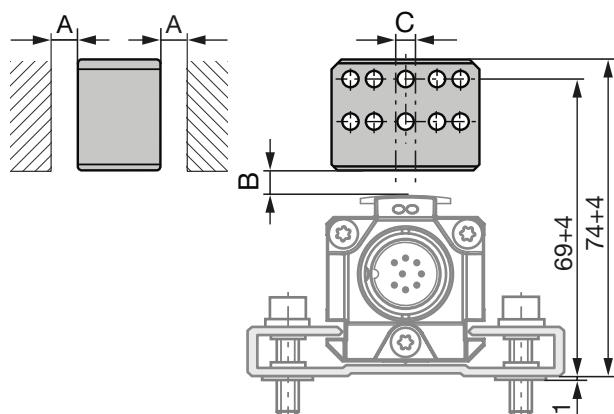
Dimensions and distances with BTL6-A-3800-2 magnet
